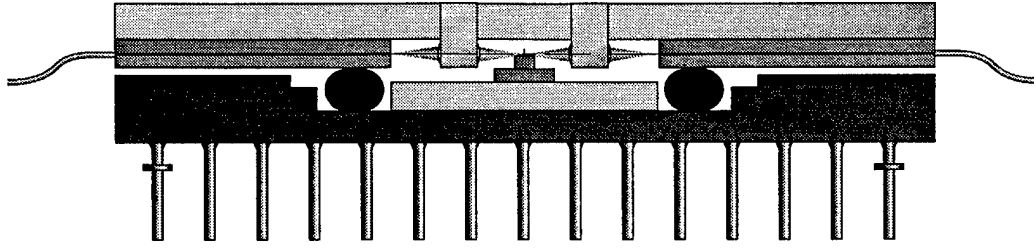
Side view cross-section of package concept. (Clamp not shown.)
